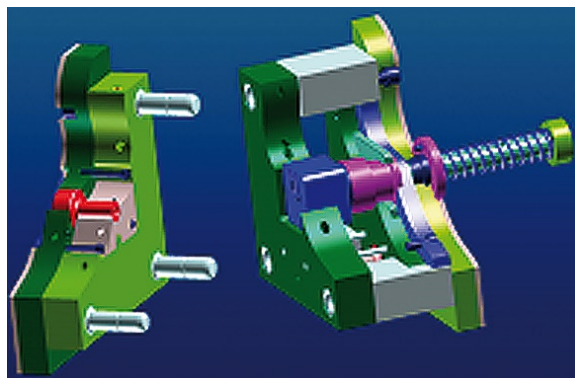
Injection mould (modular construction) for the injection moulding machine Arburg 320C.
